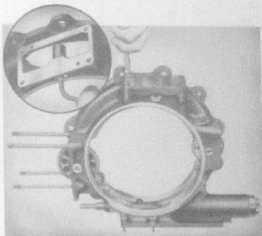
Installing Auxiliary Pad Shaft and Auxiliary Pad Cover Plate Into Support
